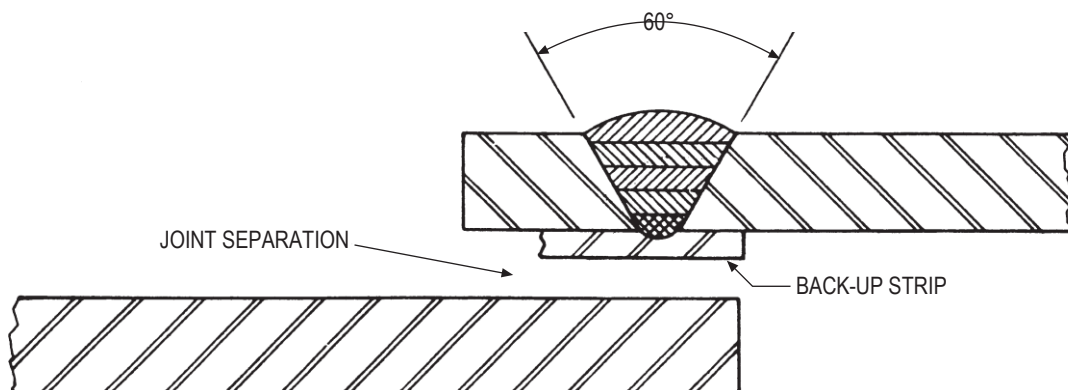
Welding fracture that extends into riveted joint (with back-up strip)
